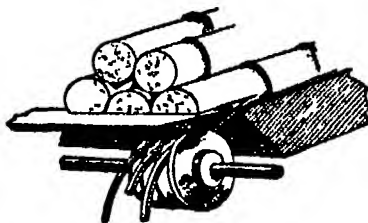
Bamboo-shredding machine patented by A. H. Williams
